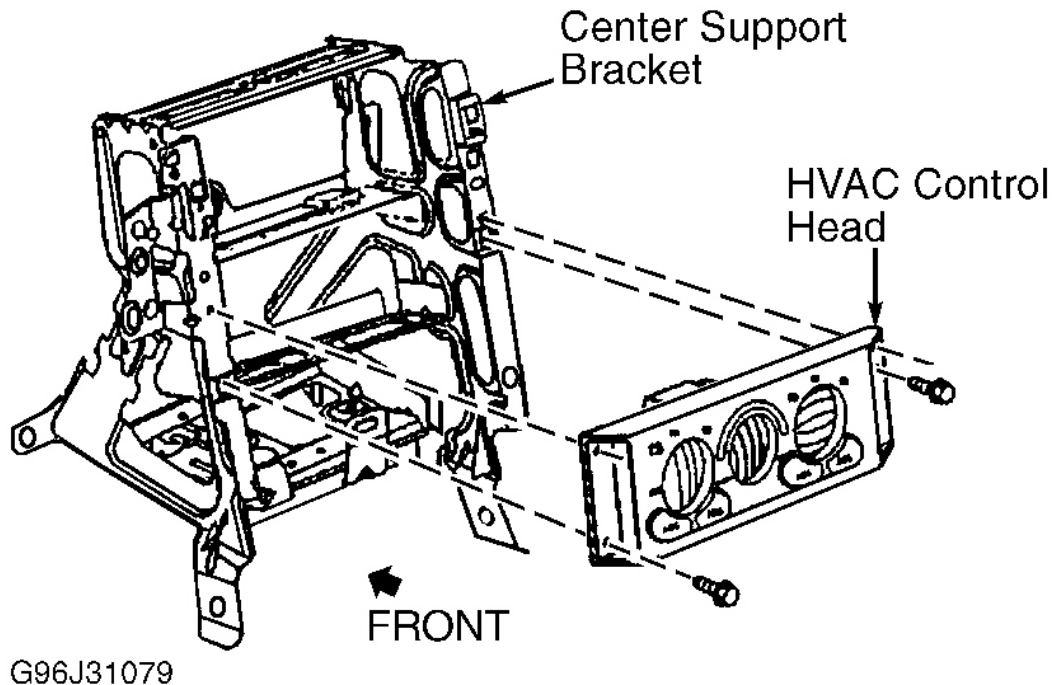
Removing HVAC Control Head & Center Support Bracket
